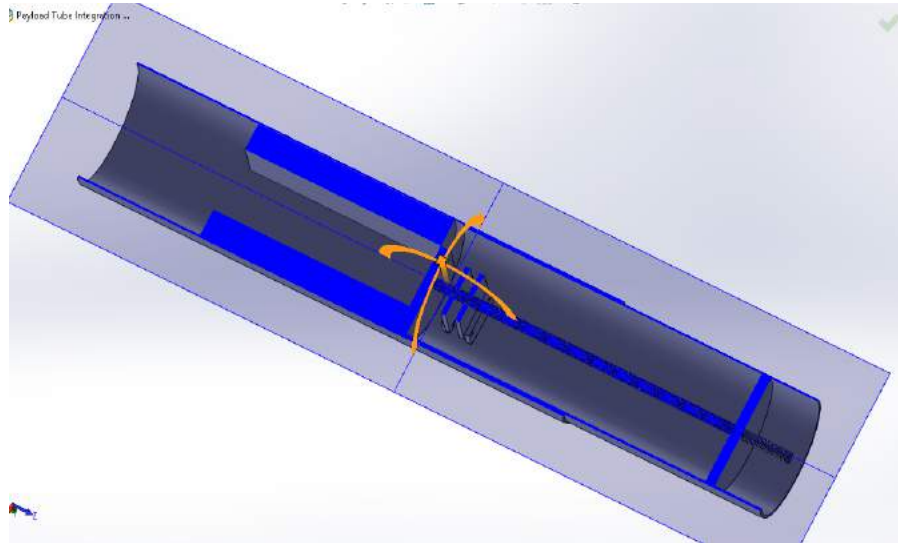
Top View of Gear System Integrated into Payload Tube
